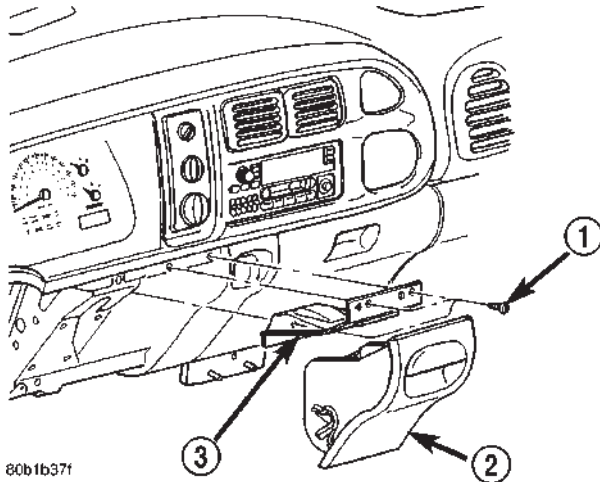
Instrument Panel Ash Receiver Remove/Install
